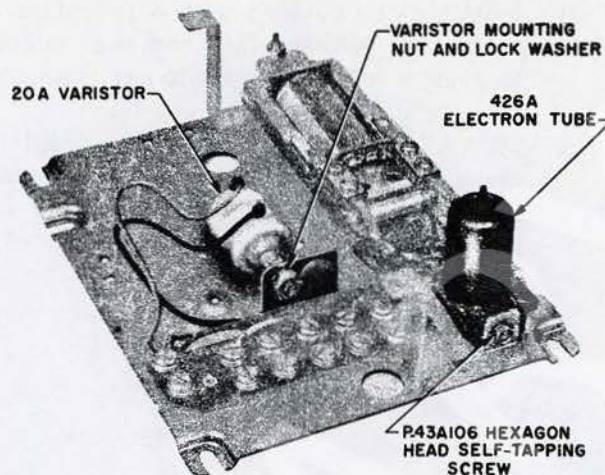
Assembly of Tube and Varistor in 687-Type Subscriber Set
